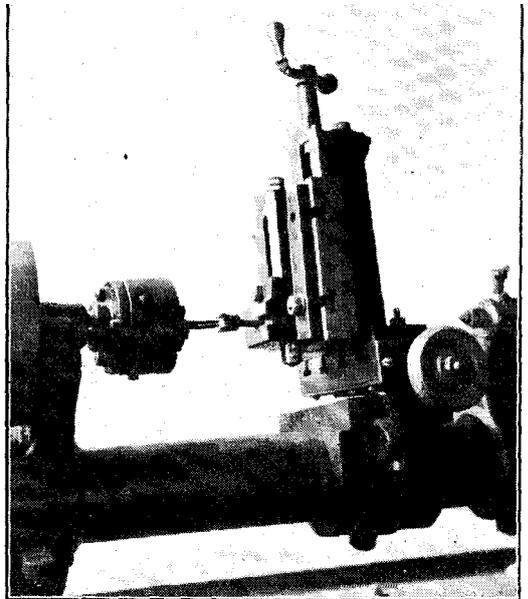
Setting a Model Connecting-Rod for Slot Milling the Knuckle End.
